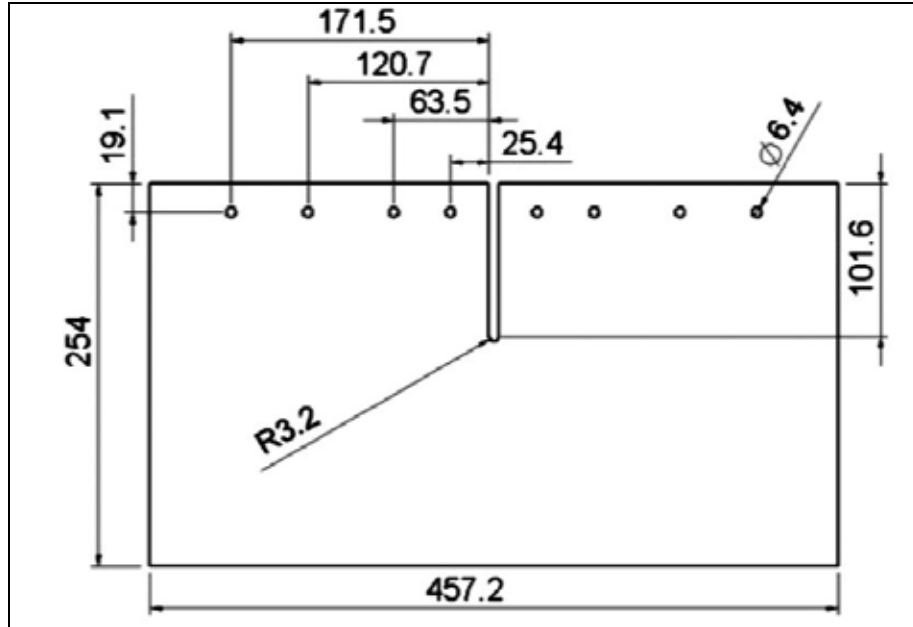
Edge-notched carbon fiber panel geometry (dimensions in mm)
